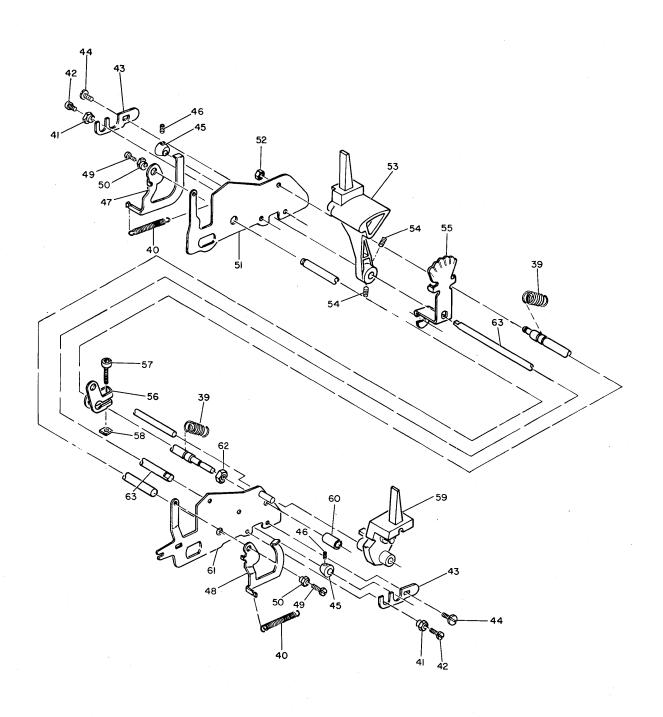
PAPER FEED ASSEMBLY. SHEET 2 OF 2. INDEX NOS. 39-63.
